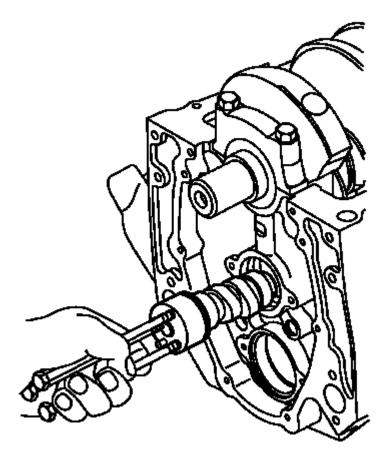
View Of 5/16-18 X 4.0 Inch Bolts Installed Into Front Of Camshaft Courtesy of GENERAL MOTORS CORP.
